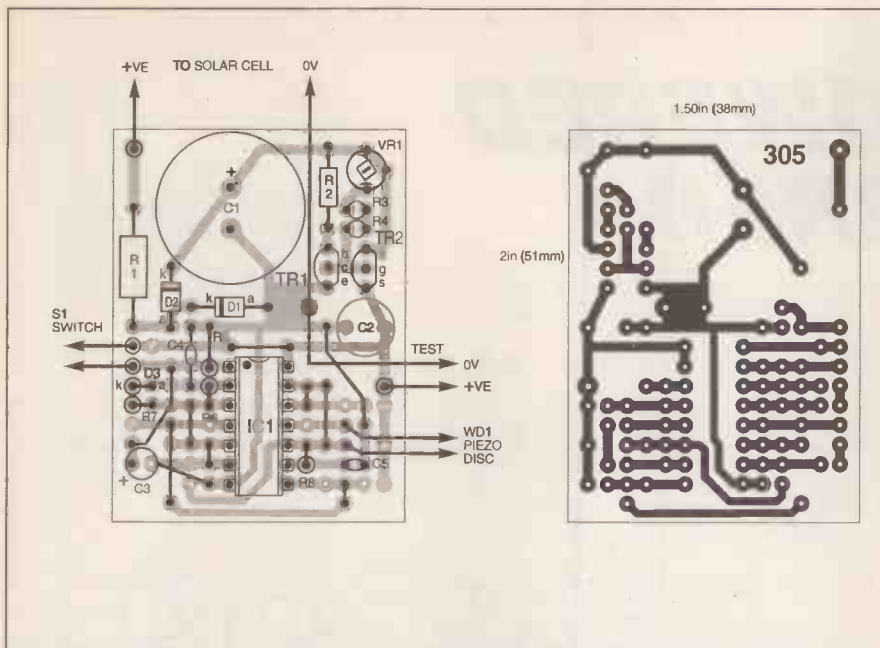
Uniboard p.c.b. component layout and full-size copper foil master for the Gate Sentinel. Includes components for the power supply regulator – see photograph.
